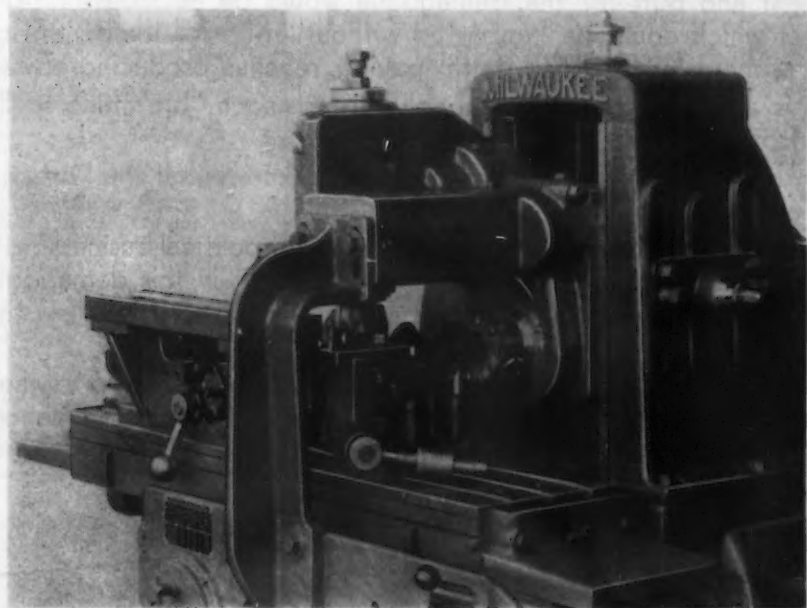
The first operation, performed in the right-hand section of the fixture, consists of milling four ports and a pad which are at right angles to the ports. o o o
